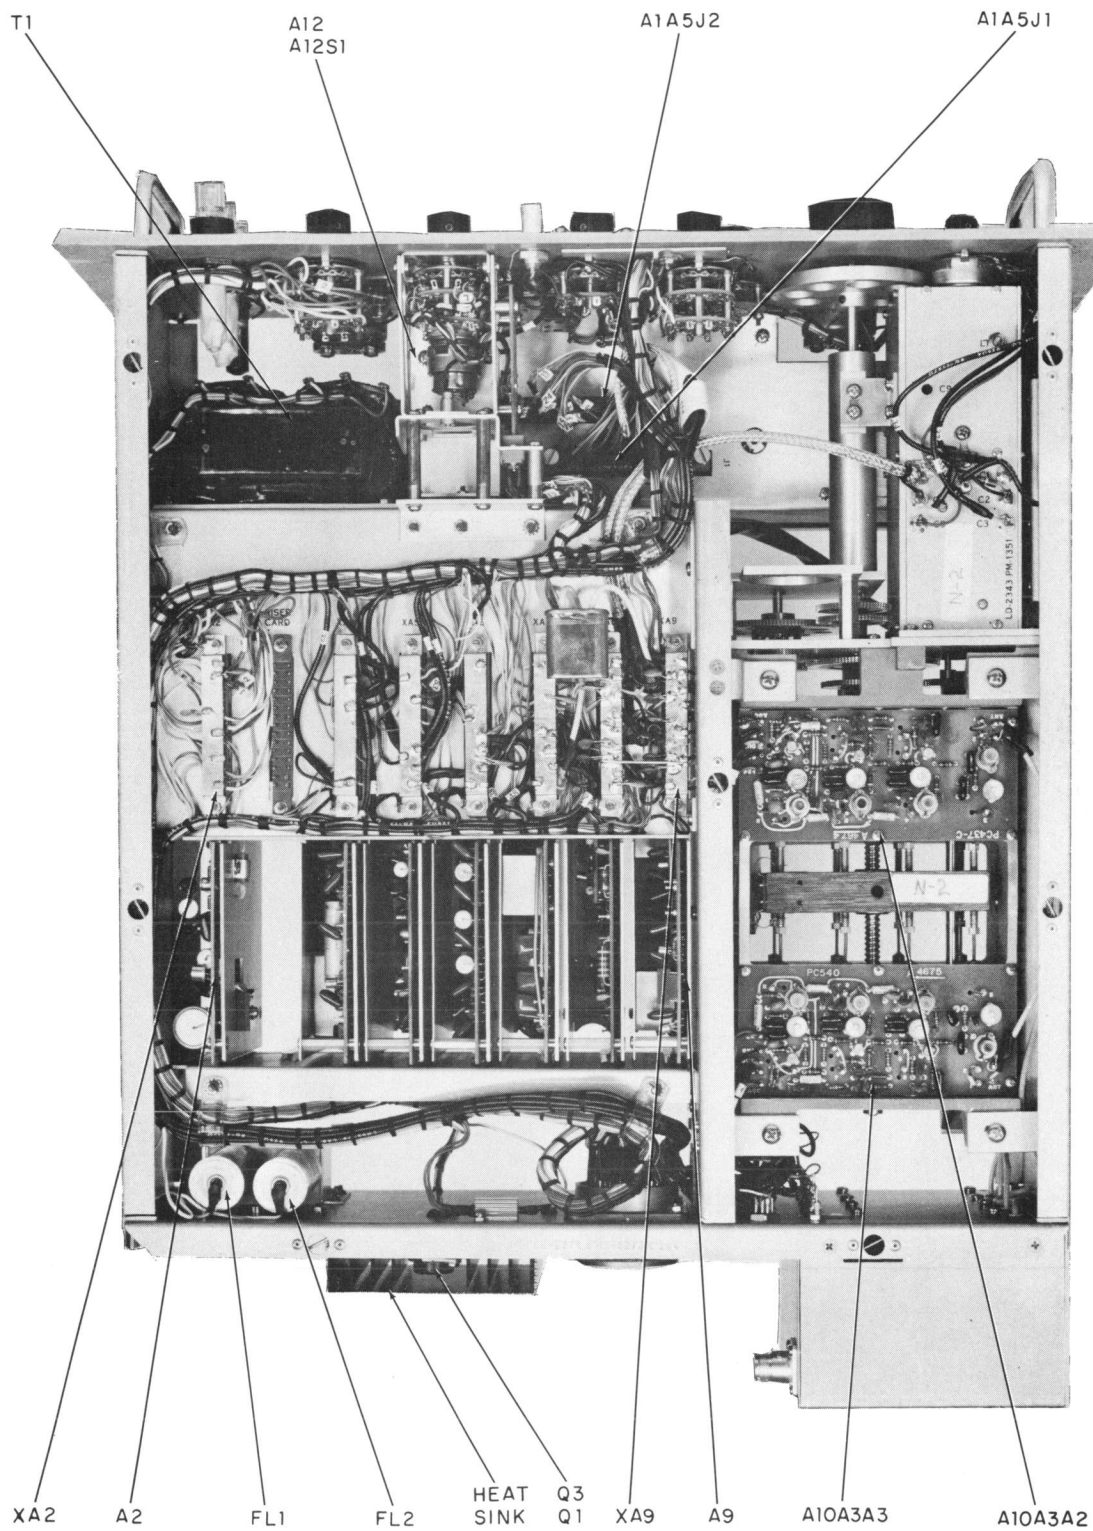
Major Component Locations, Bottom View of Unit 1
